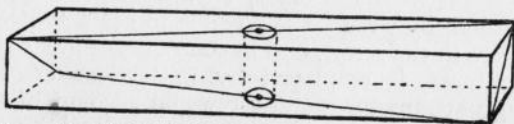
Method of "laying off" a piece of wood from which a truly helical screw is to be carved.
